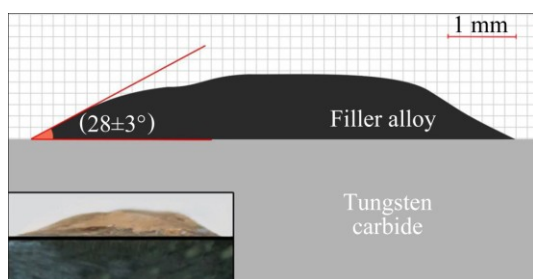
Contact angle of wetting specimens brazed at 730 °C for 15 min with filler alloy of 150 μm in thickness
